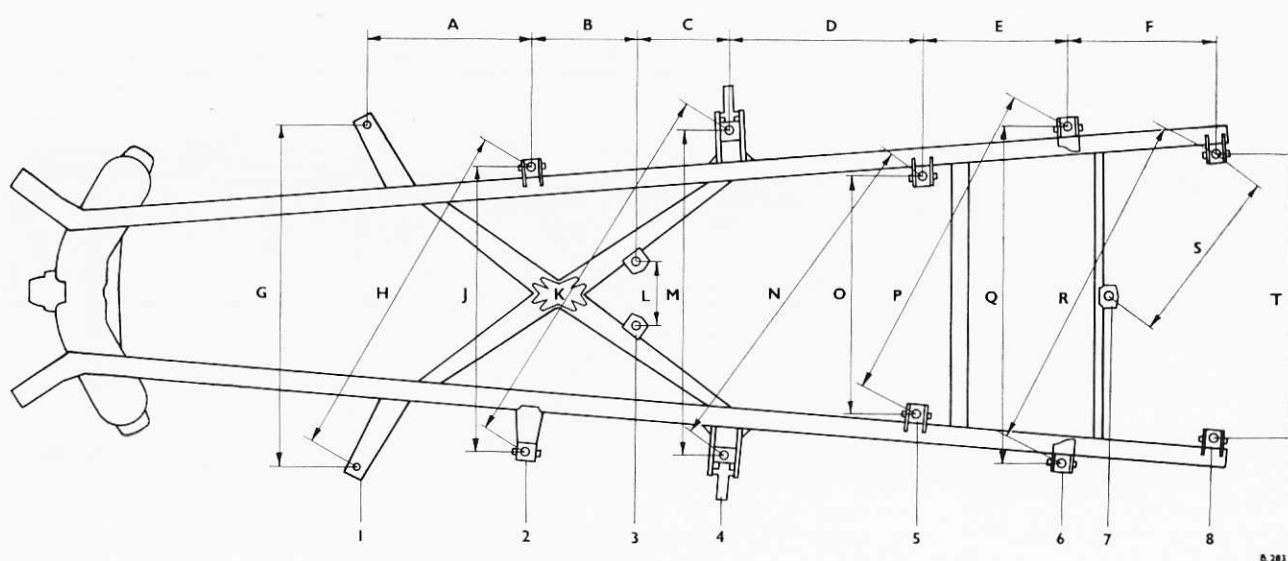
Chassis frame and body checking dimensions for all S2 cars except Phantom V
